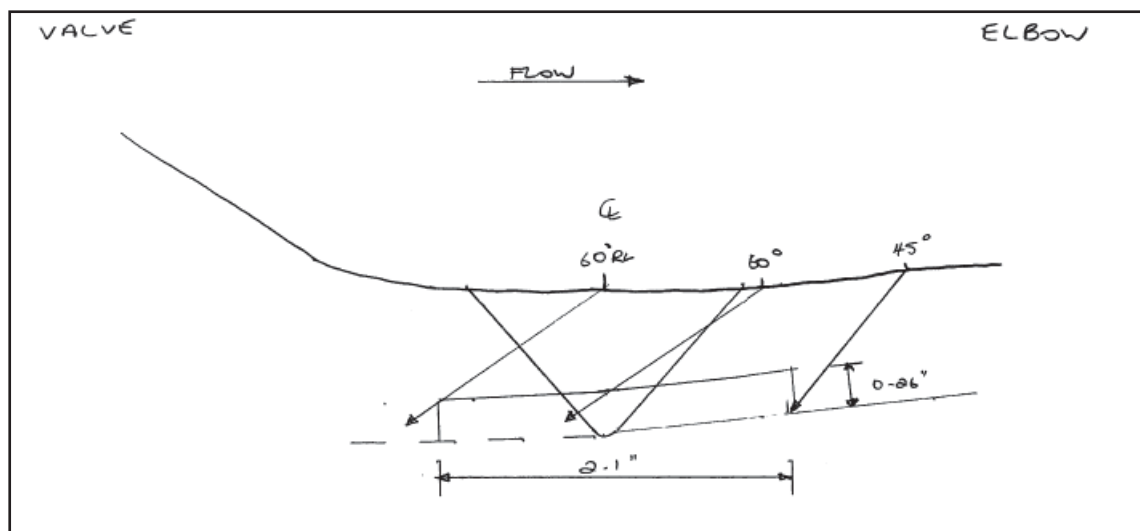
Weld SIF-D091-04, Weld Profile Axial Scan
